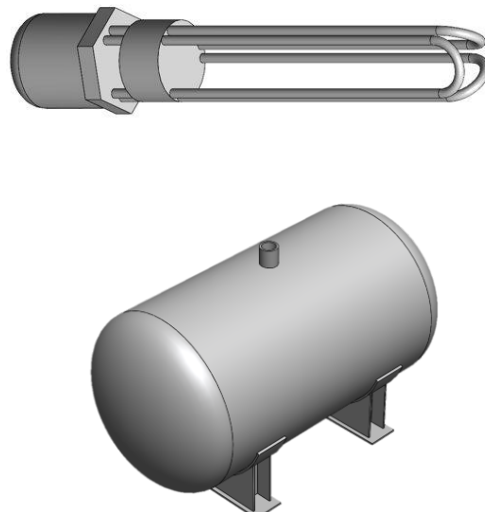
Electric Steam Generator (Bottom) and Heating Element (Top) CAD Drawings
